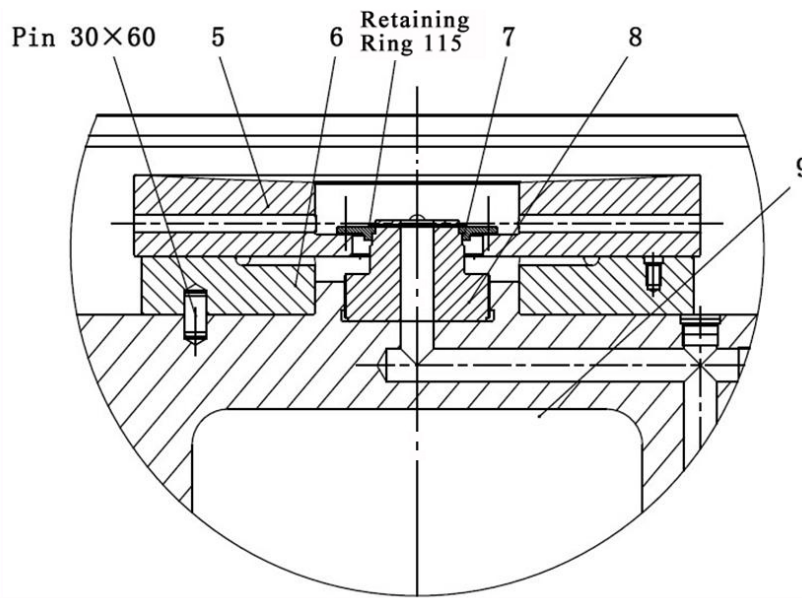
Assembly drawing for middle and lower friction disk of cylinder unit of PXZ-1500II
